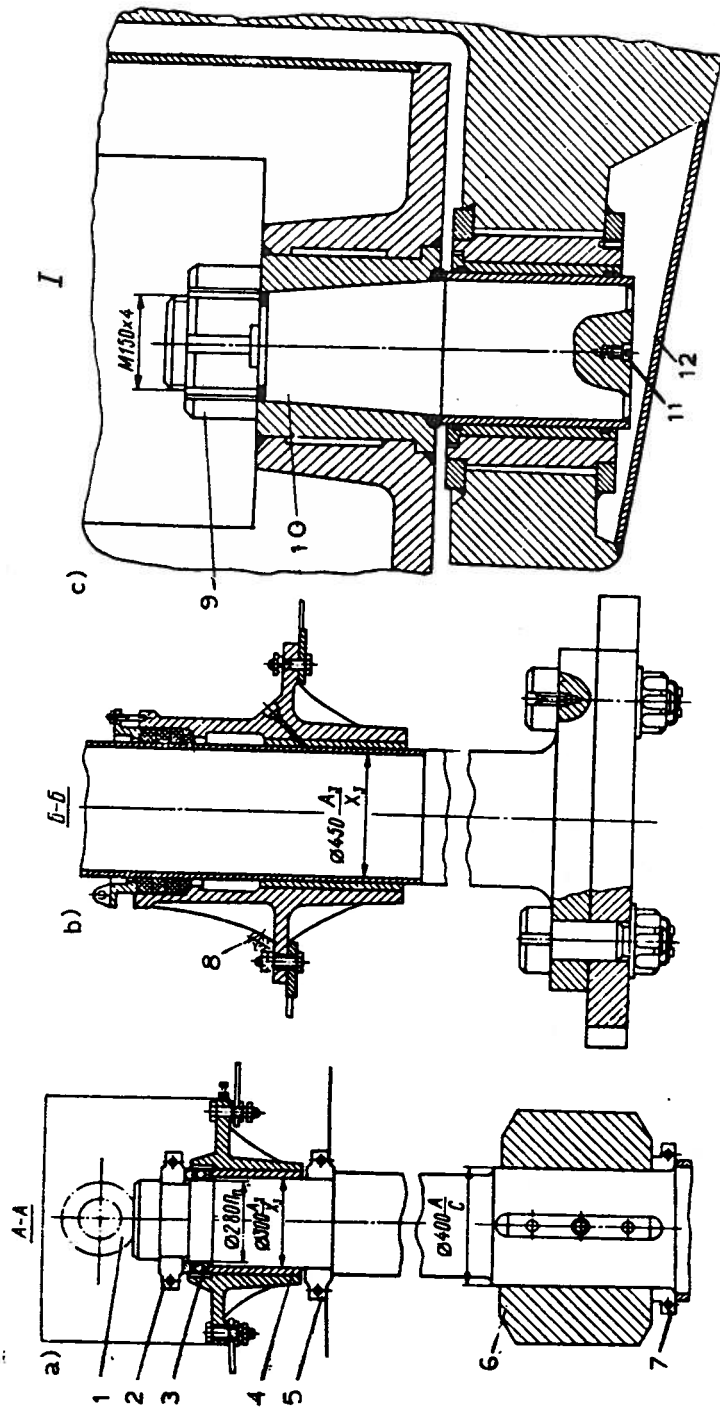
Details of rudder stock and rudder mounts in Fig. 2
